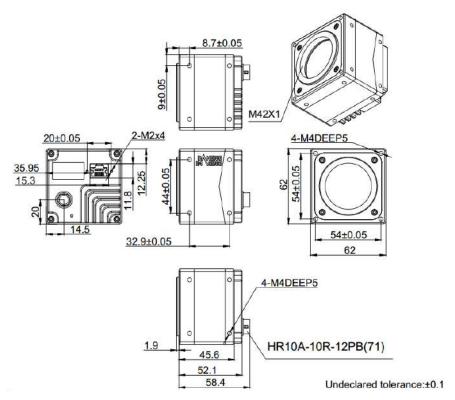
MARS-3140-3GM/C-P-M03 mechanical dimensions
